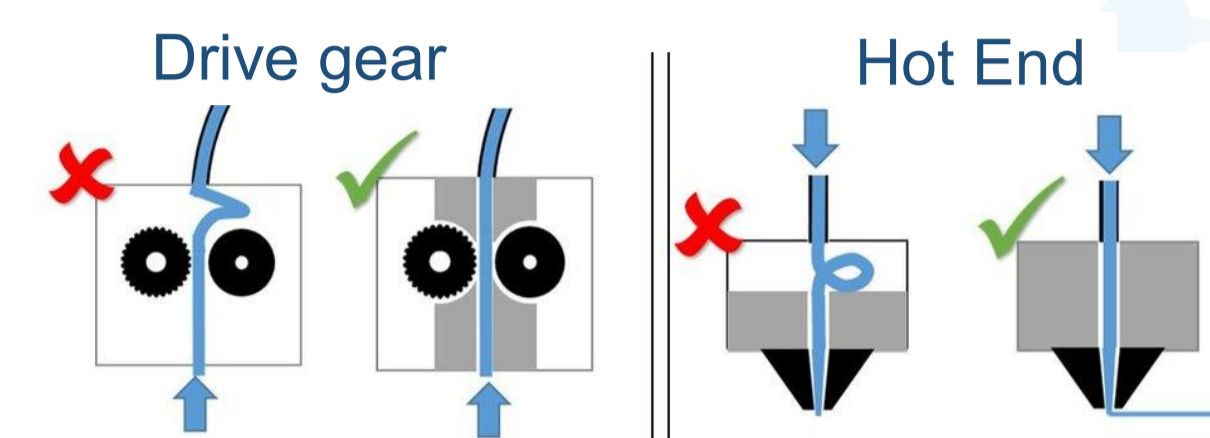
Failure mode of feed stock material in drive gear or hot end of an FDM printer.
